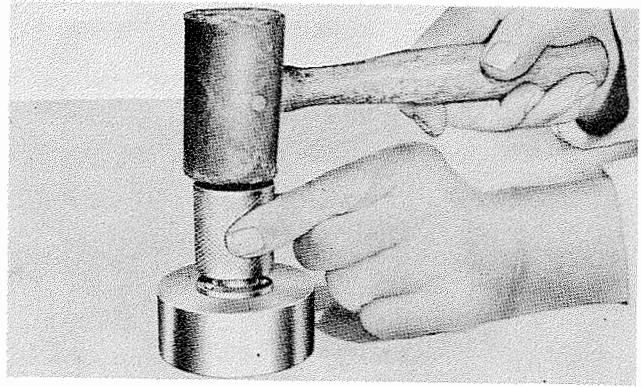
Installing Tachometer Drive Shaft Oil Seal in Retainer
